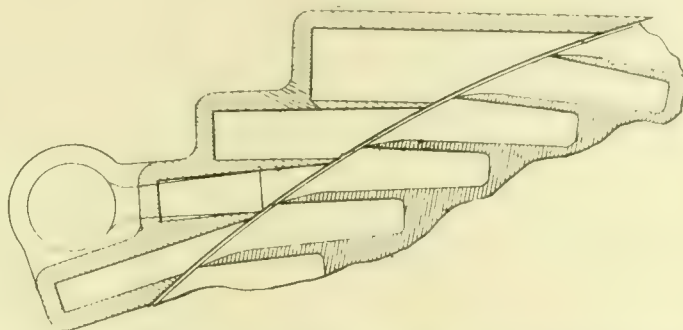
SHOWING METHOD OF REVERSING STEAM BETWEEN THE ROTOR AND THE STATIONARY BUCKETS.
